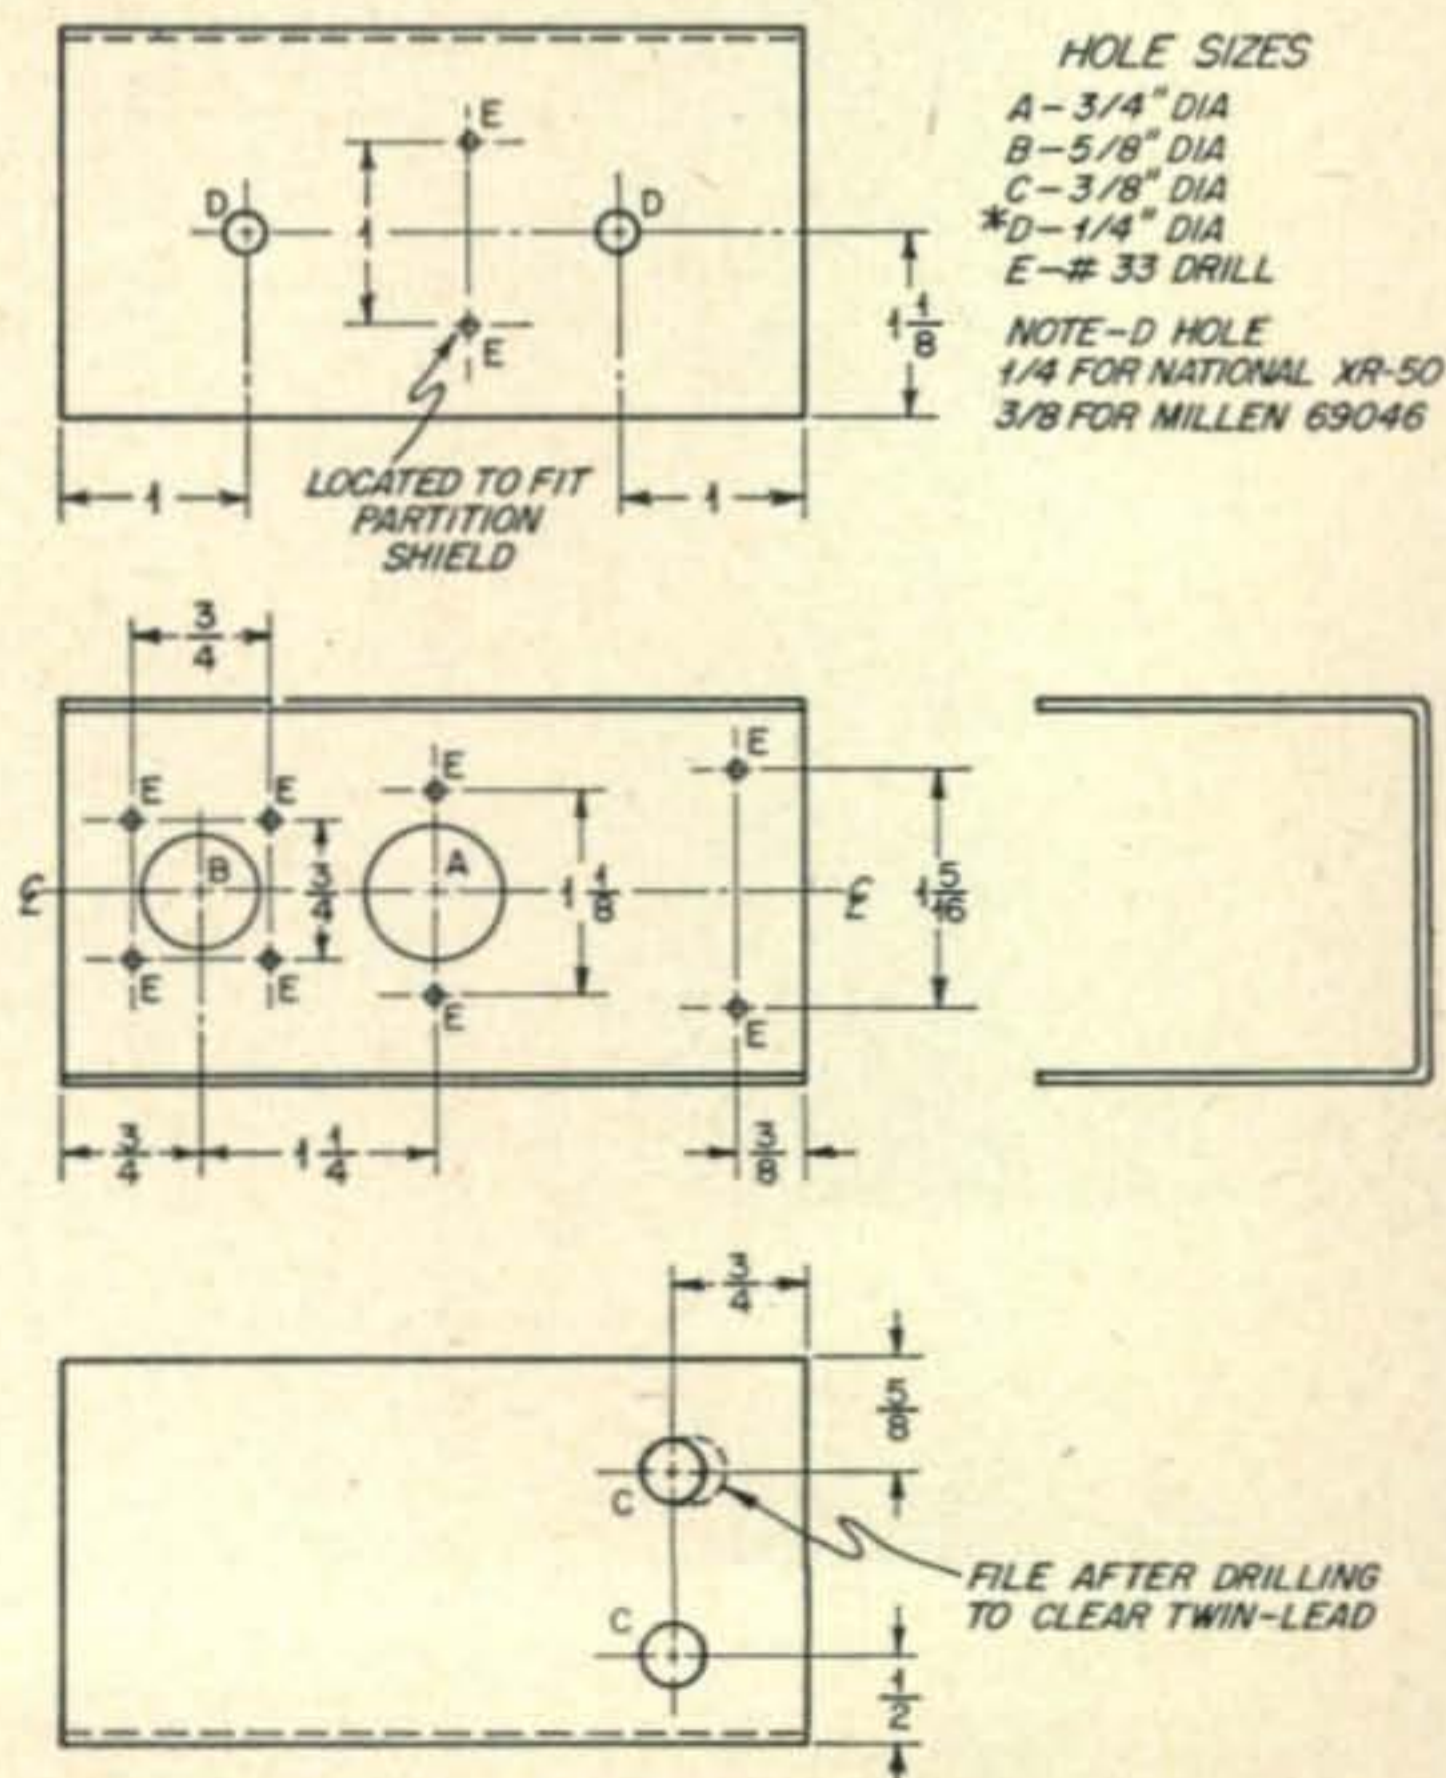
Chassis layout plan on the Bud "Minibox." The mating section is mounted on your converter.
